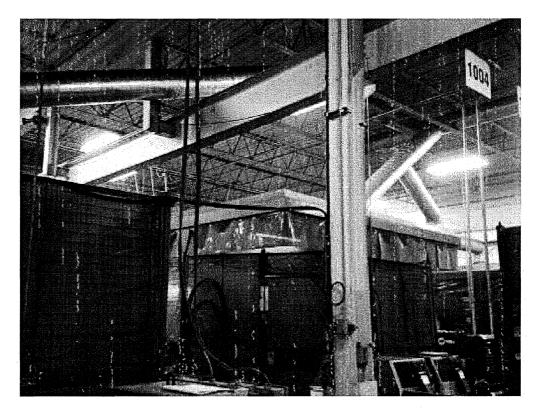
(MIG welding): MIG welding booths with exhaust stacks.
